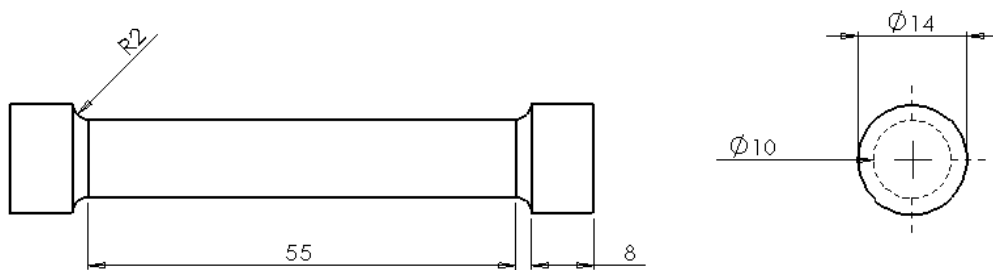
CAD drawing of the Centrifugal tensile test specimen
